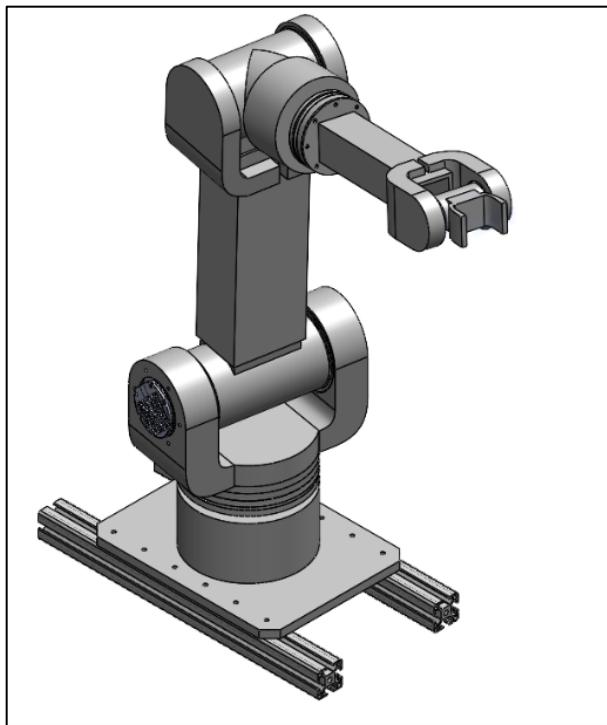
Detailed SolidWorks CAD assembly of structure and joints
